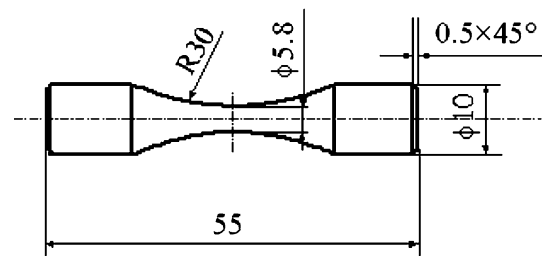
Shape and size of hour-glass-shaped round specimen for fatigue test
